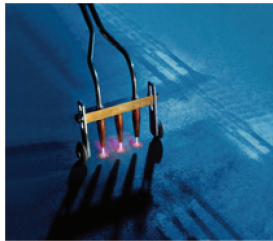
Flame straightening of a plate with 3 flame nozzles
